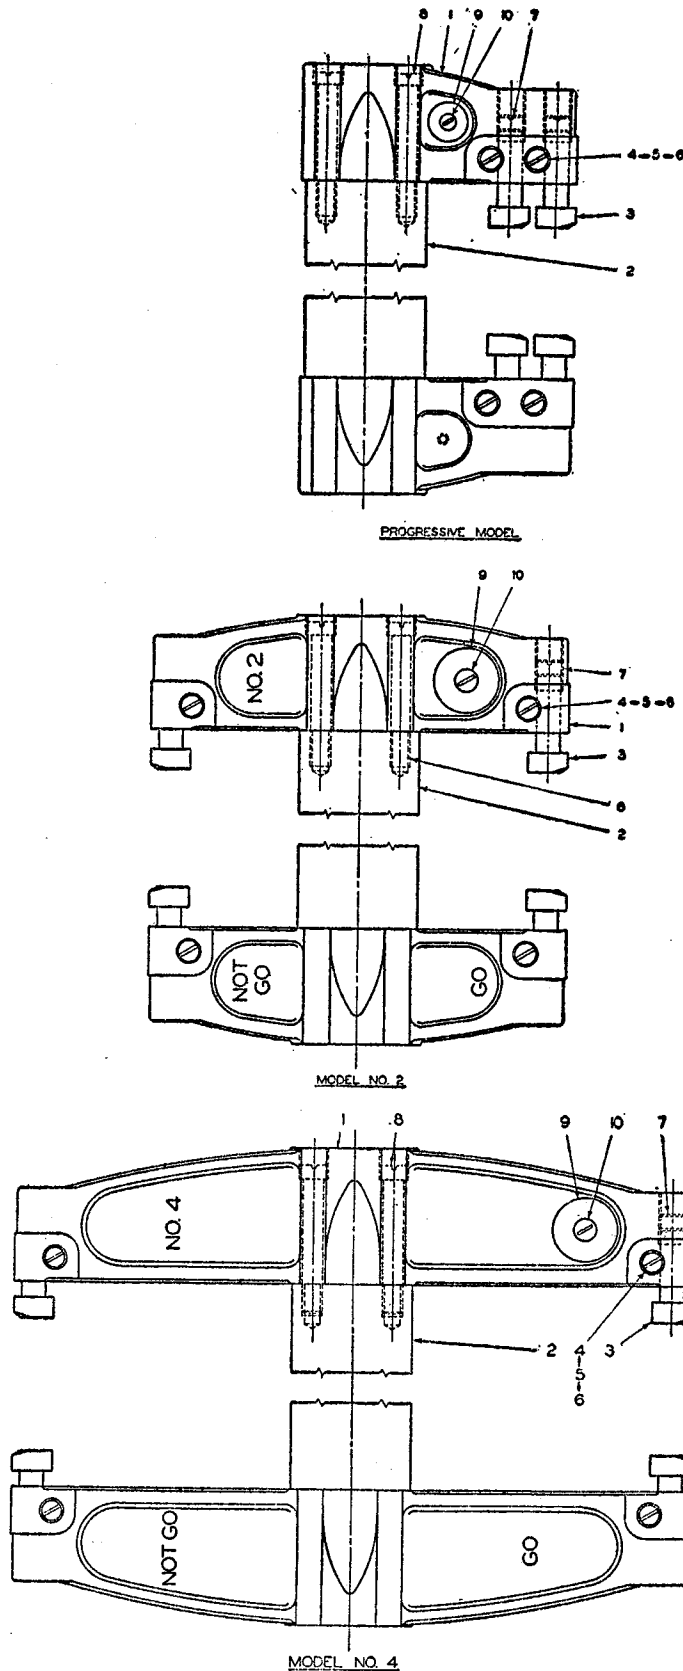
American Gage Design Standard adjustable length gages, details of construction.
